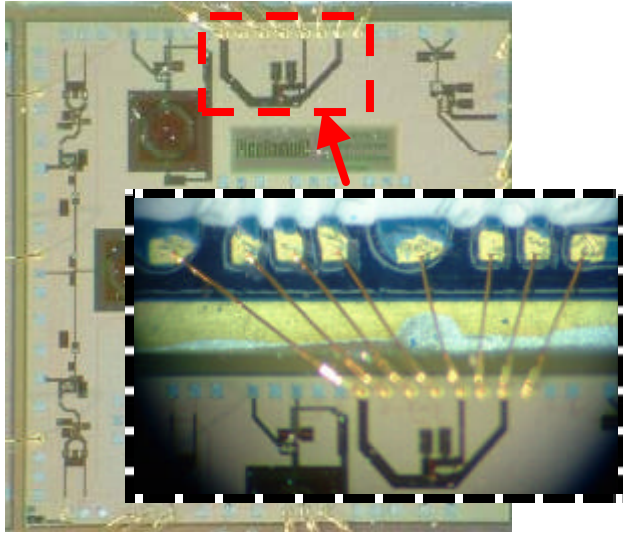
Die photo. Inset shows packaged low power amplifier using chip-on-board technology.
